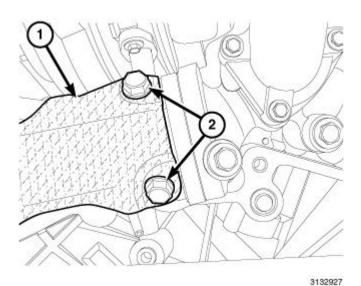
Exhaust Manifold Pipe To Turbocharger Heat Shield & Bolts Courtesy of CHRYSLER GROUP, LLC
